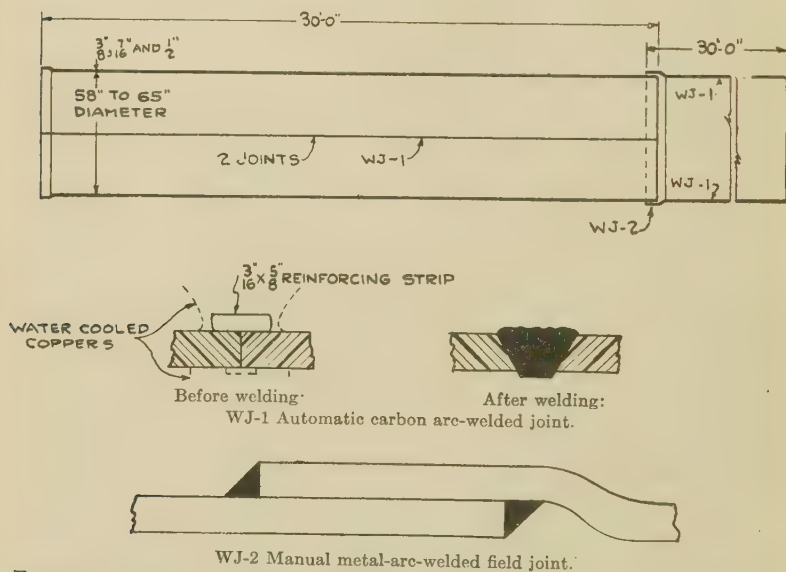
Details of carbon- and metal-arc-welded joints used in the 90-mile pipe line for the East Bay Municipal Utility District of California.
